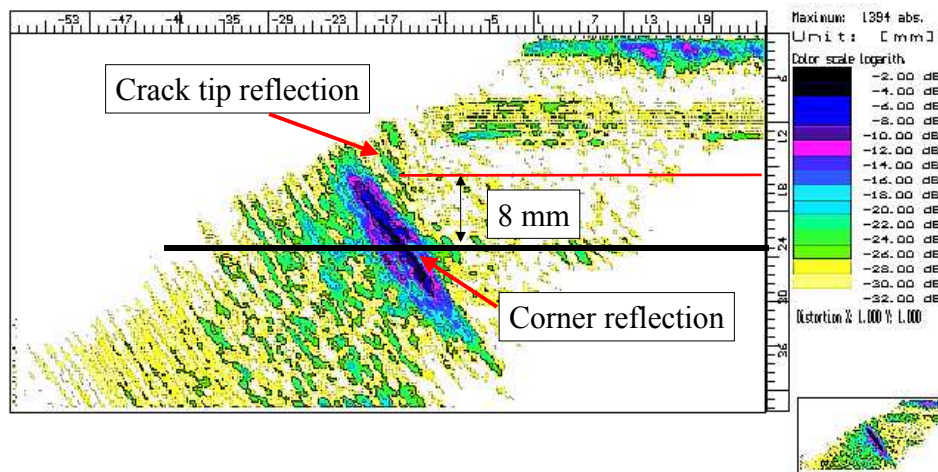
SAFT reconstruction for an IGSCC crack in front of an austenitic weld.
